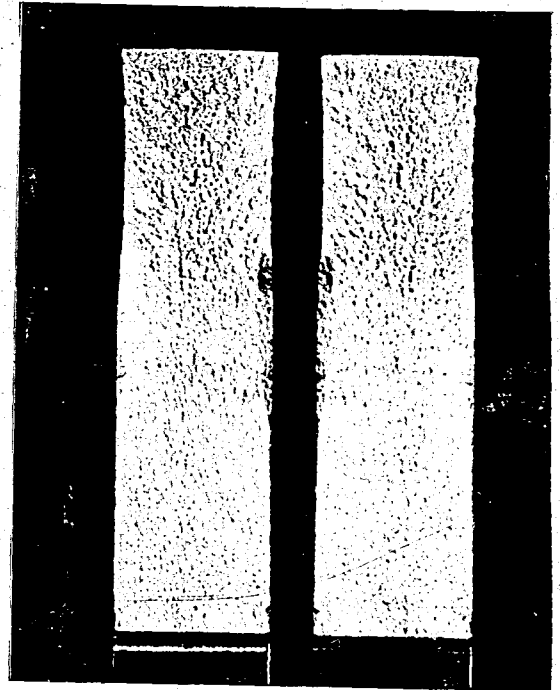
Fracture surfaces of specimen 8 ( $O/L=1.25$ )
